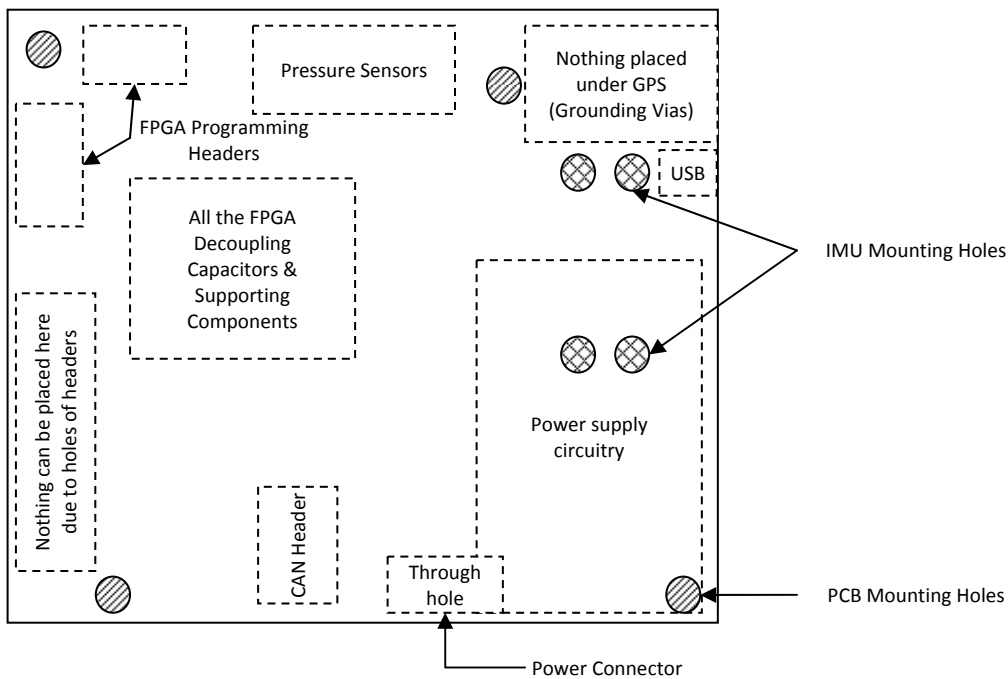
Component Placement Strategy overview of the Bottom PCB Layer (Viewed through the Top Layer)
